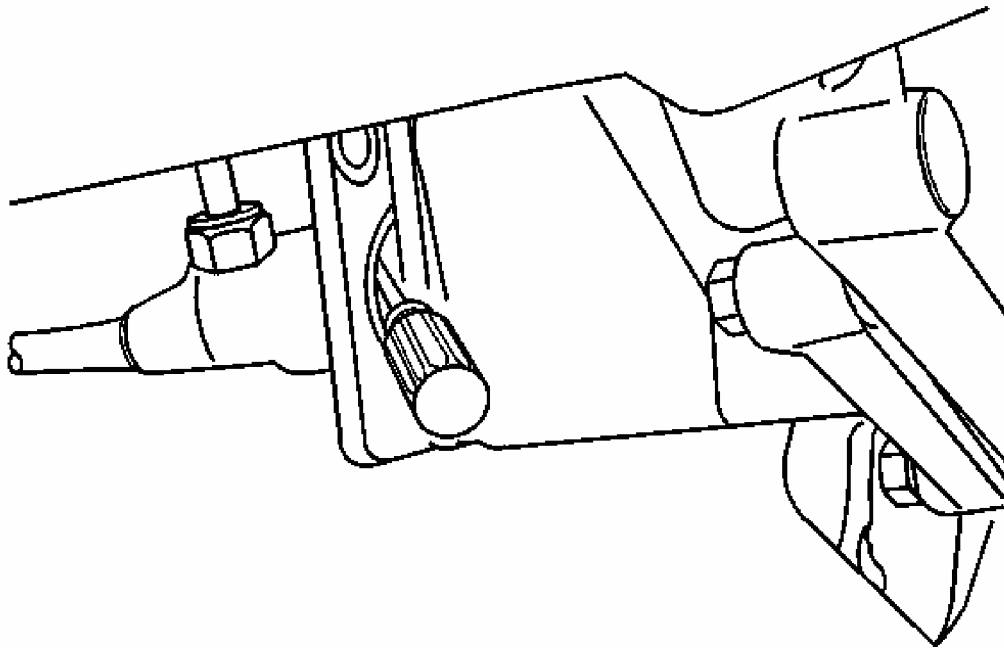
Disconnecting Clutch Cable Retainer Spring Using Screwdriver
